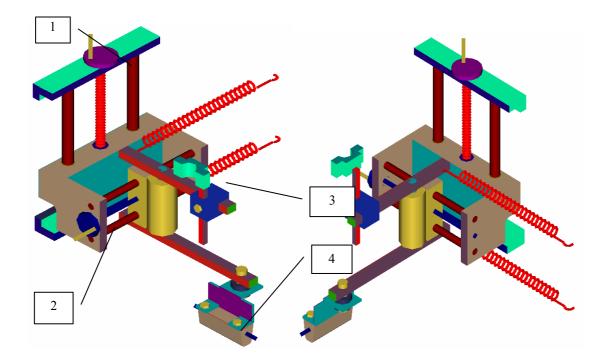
Positioning and adjustment device 1 - Clamp for vertical positioning of the torch, 2 - Clamp for horizontal positioning of the torch 3 - Catch member for the torch, 4 - Copper guide track
